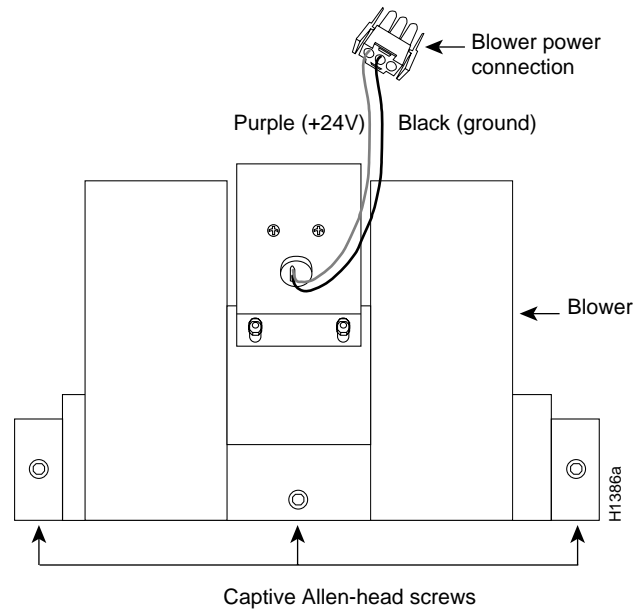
Fan Tray Assembly (Cisco 7505)
